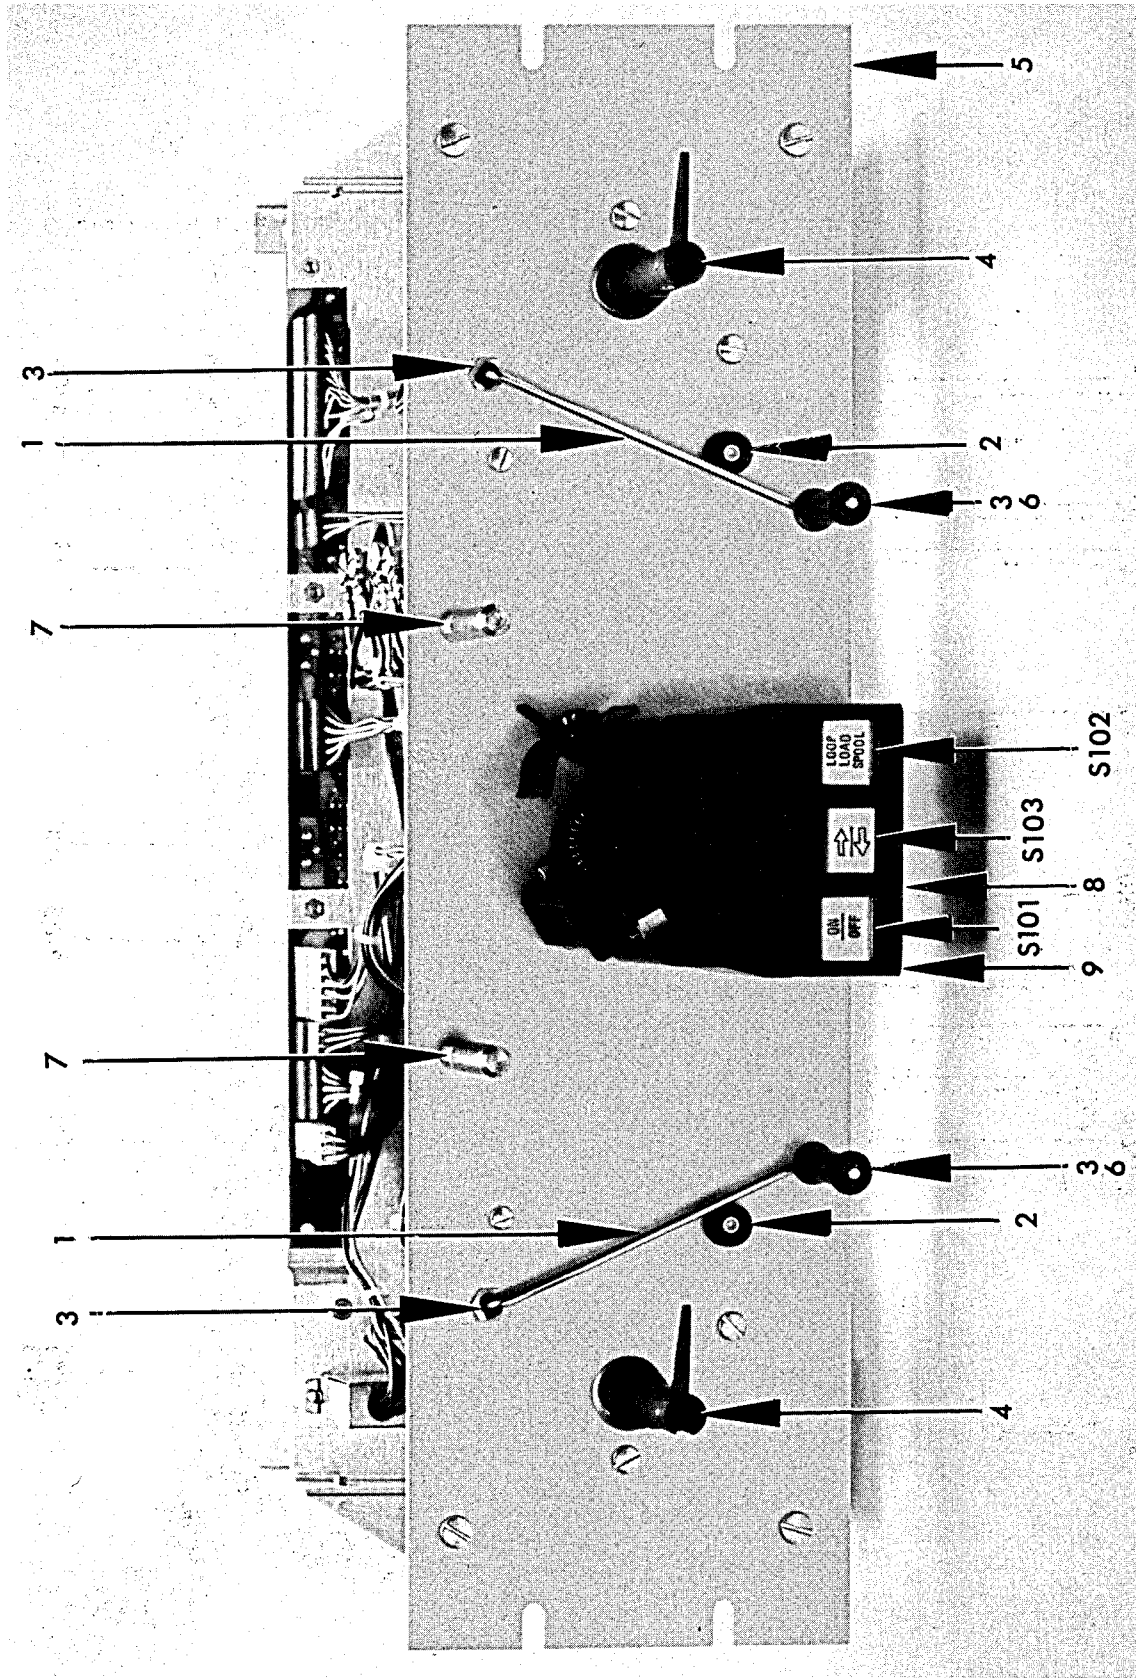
Front Panel, RRS7155BA1/660/G-A, Front View.
